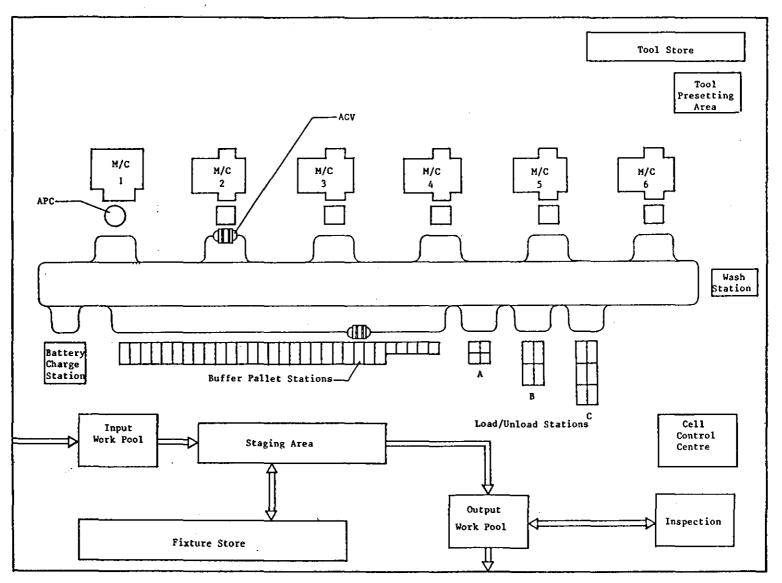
FMS G with CNC Machines, 2 Pallet APC, and AGVs
